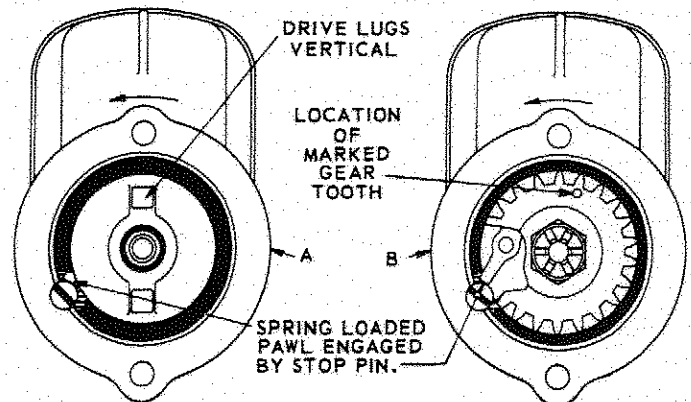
, DRIVE GEAR TIMING MARK ASSEMBLY
